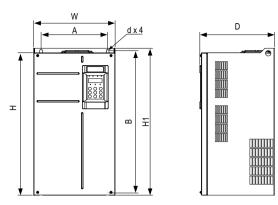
Overall and mounting dimensions of GE200T45G(B) to GE200T160G and GE 200-2T22G(B) to GE200-2T55G
